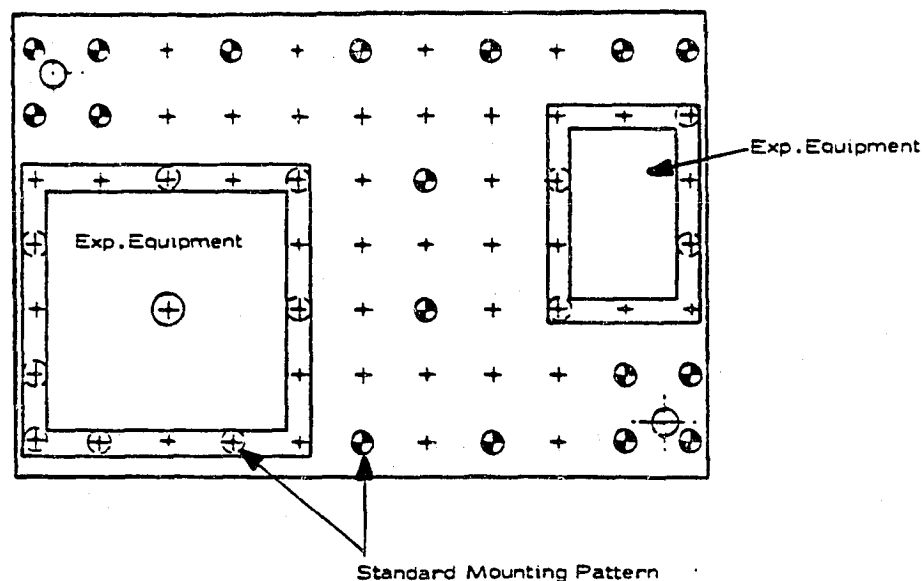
EXAMPLE - DIRECTLY MOUNTED EQUIPMENT
